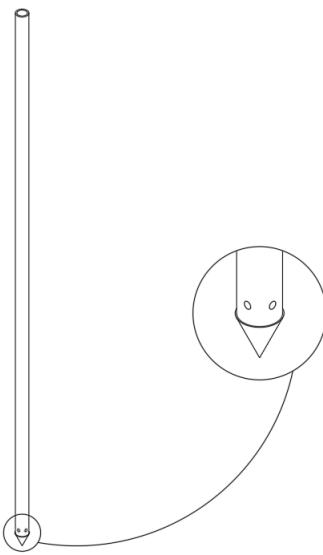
Injection Tube. This 6 foot long tube has 4 holes of a  $\frac{5}{16}$  inch diameter drilled 90 degrees apart 1 inch above the start of the cone shaped tip.
